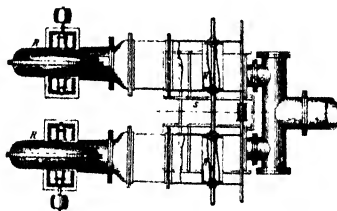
¹. Hochstraute dry coal cleaning machine. Plan.
